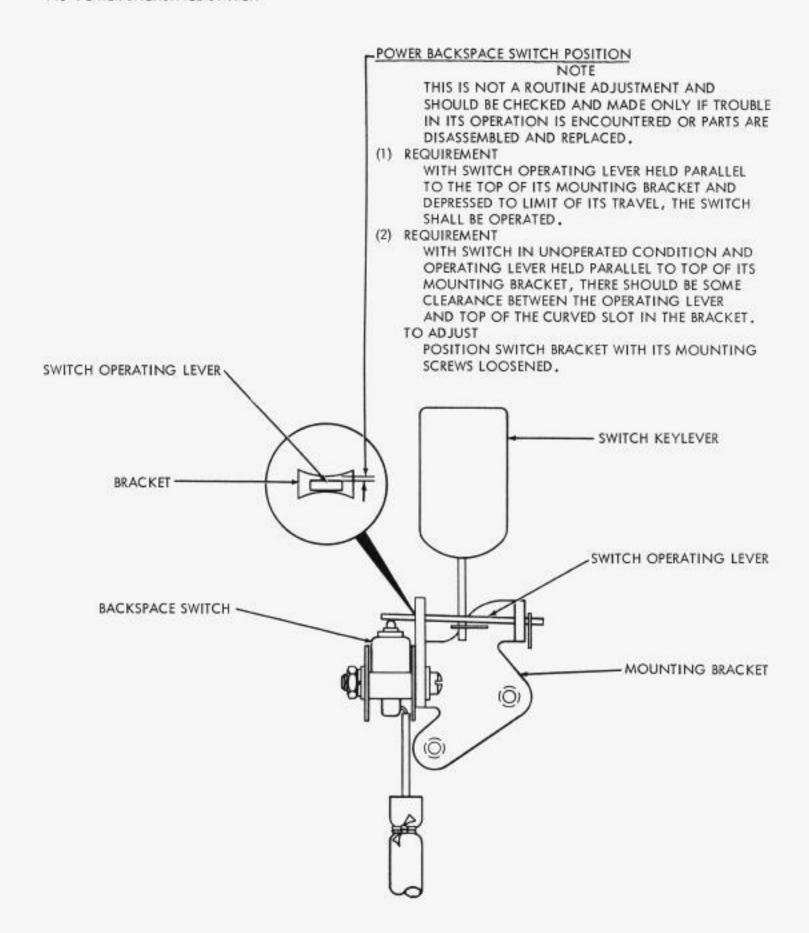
KEYBOARD, POWER BACKSPACE SWITCH
